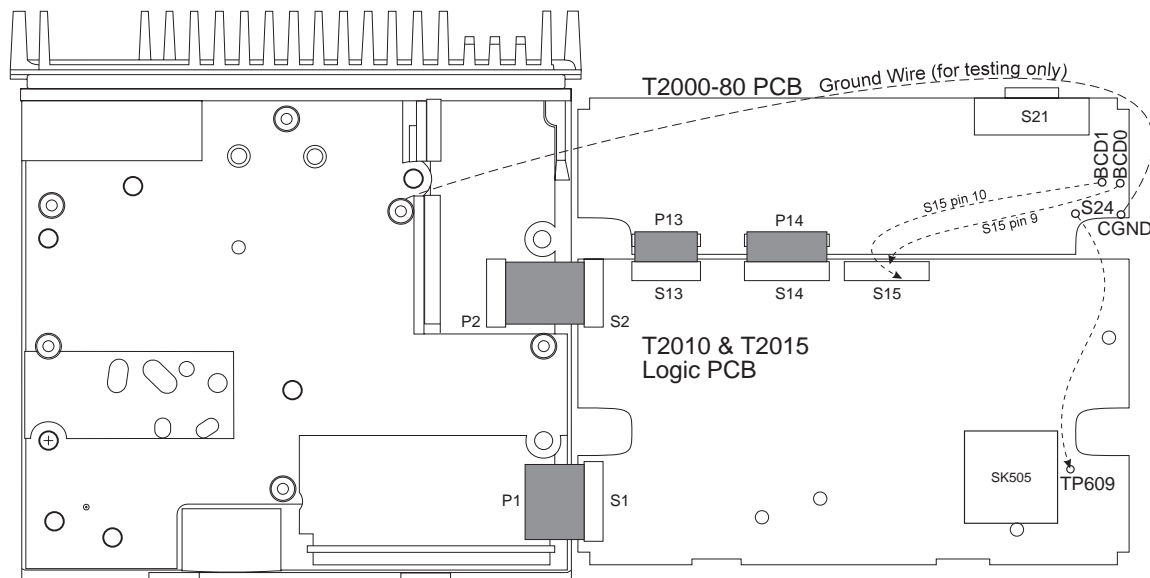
T2000-80 Line Interface PCB Mounting (T2010/T2015 shown)
